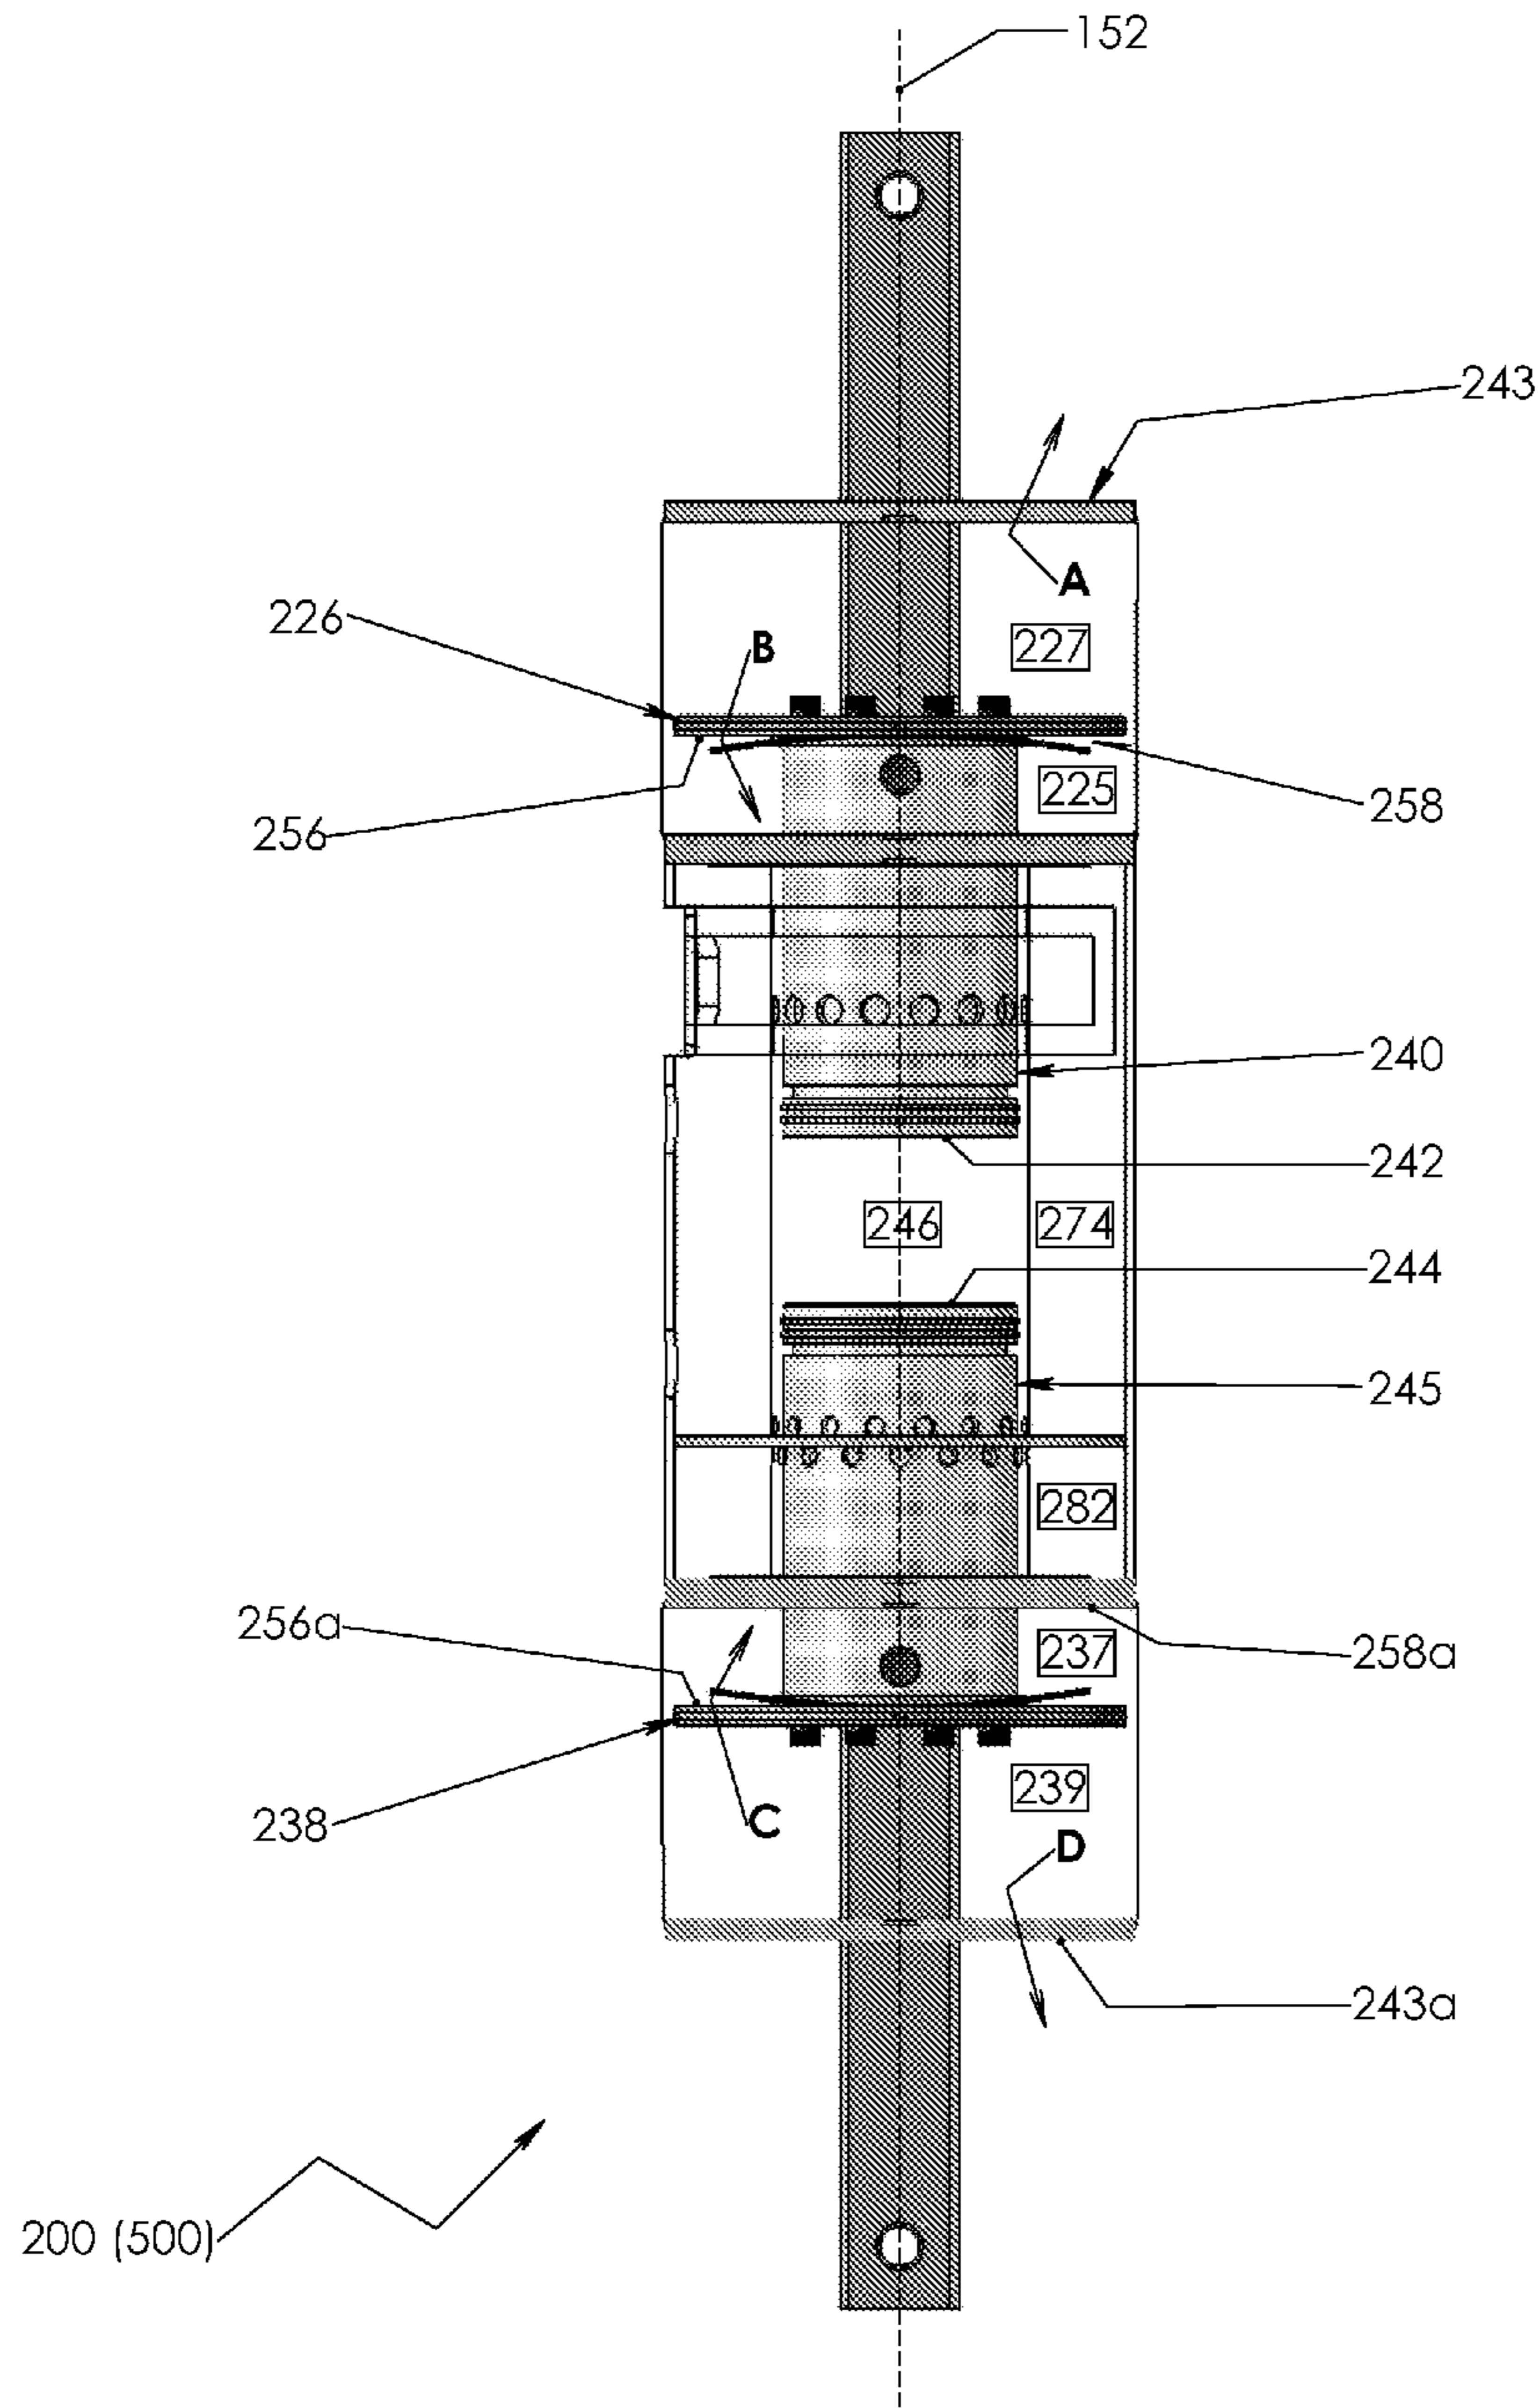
C. SIDE, CROSS-SECTIONAL VIEW OF COMBUSTION ASSEMBLY DURING ENGINE CYCLE
